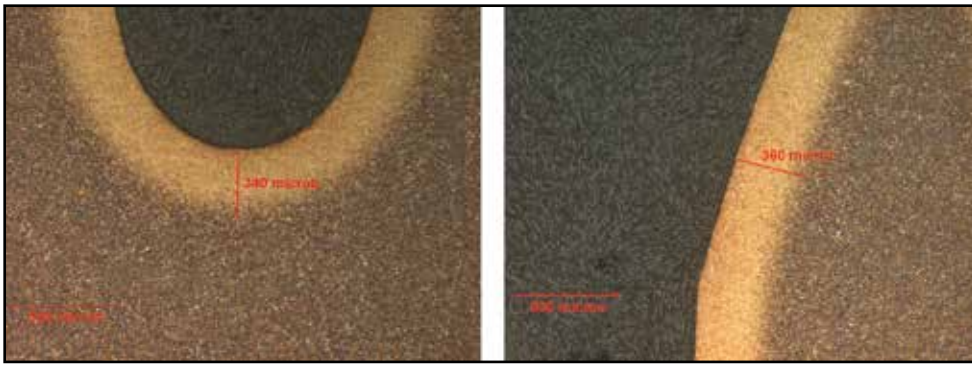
LPC process: carburized case in gear root (left), carburized case in gear tooth (right).
